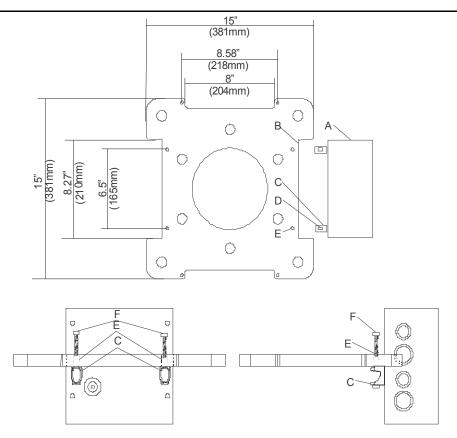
Electrical Junction Box Installation on Single Mounting Plate
